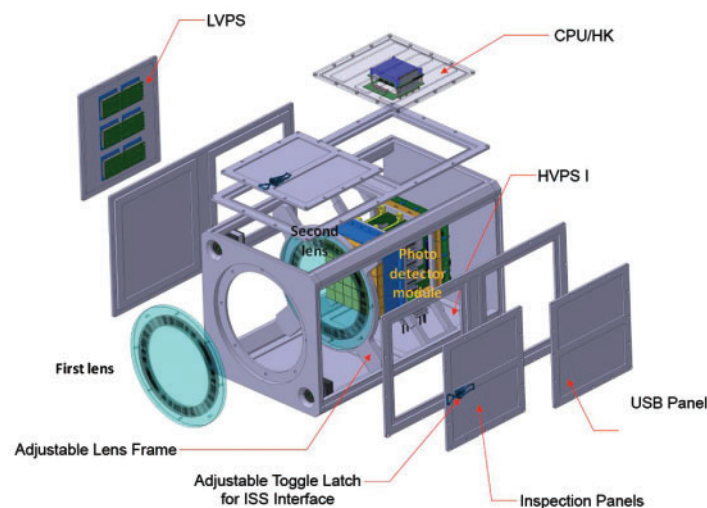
Exploded view of the Mini-EUSO detector. Dimensions are $35 \times 35 \times 60$ cm (lens diameter 25 cm).
